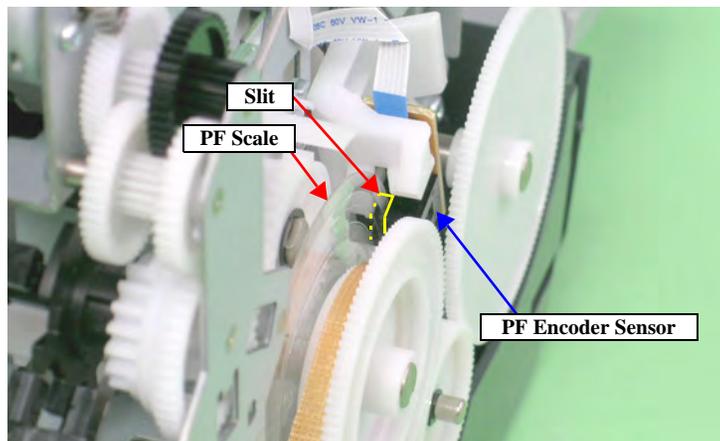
Reinstalling the PF Encoder Sensor Holder
